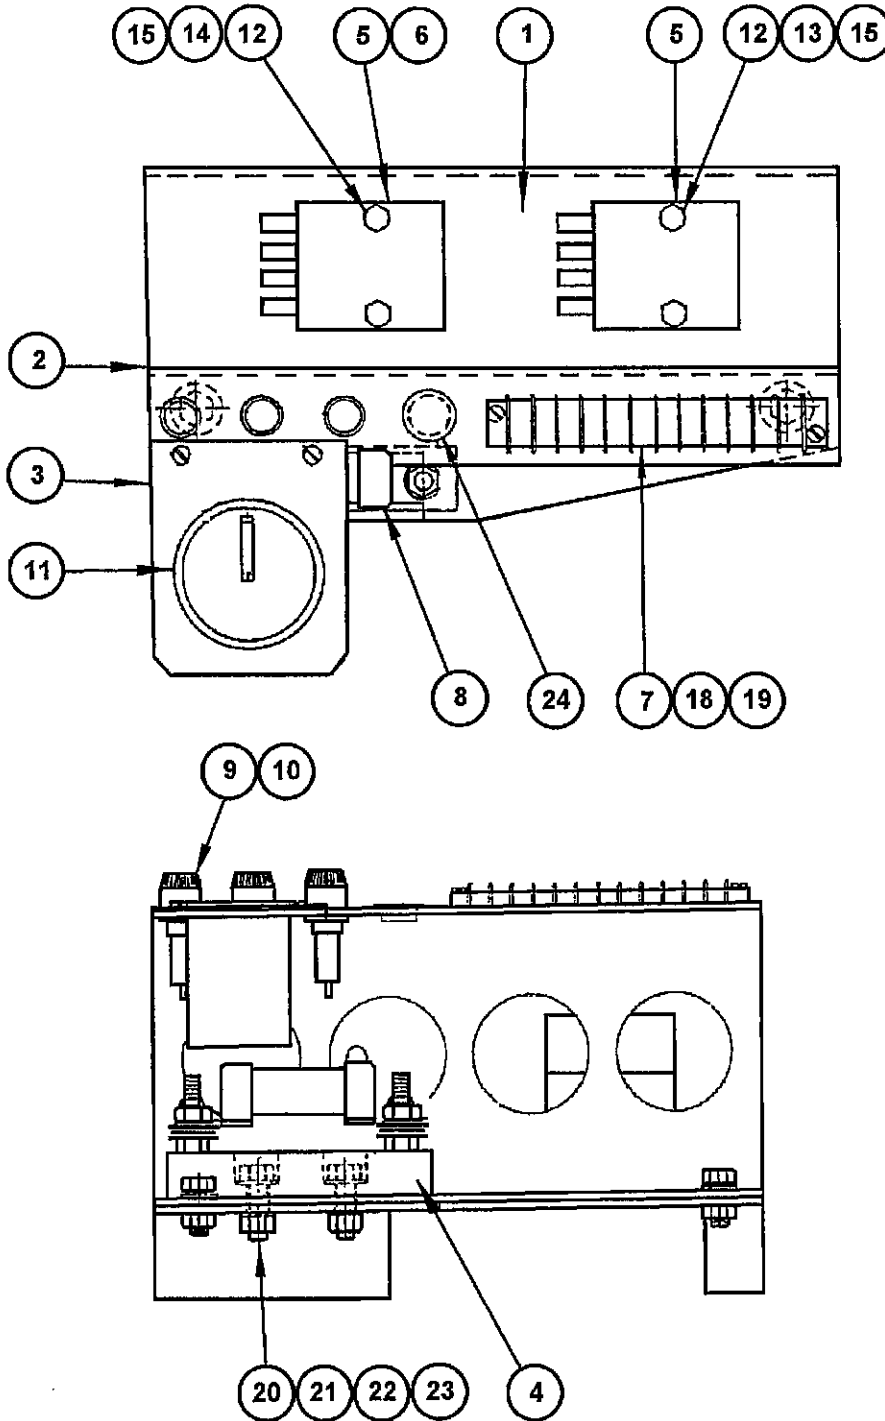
Top Assembly, Battery/Gate, p/n: 13401-07-S (sheet 3 of 4)
